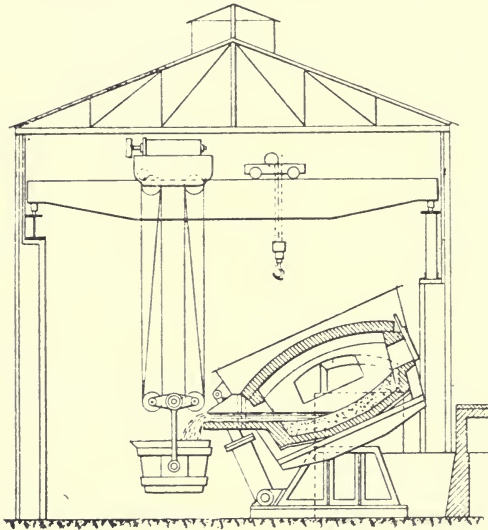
Wellman Rolling Furnace. Pouring Through Spout into Ladle Carried on Overhead Crane.
